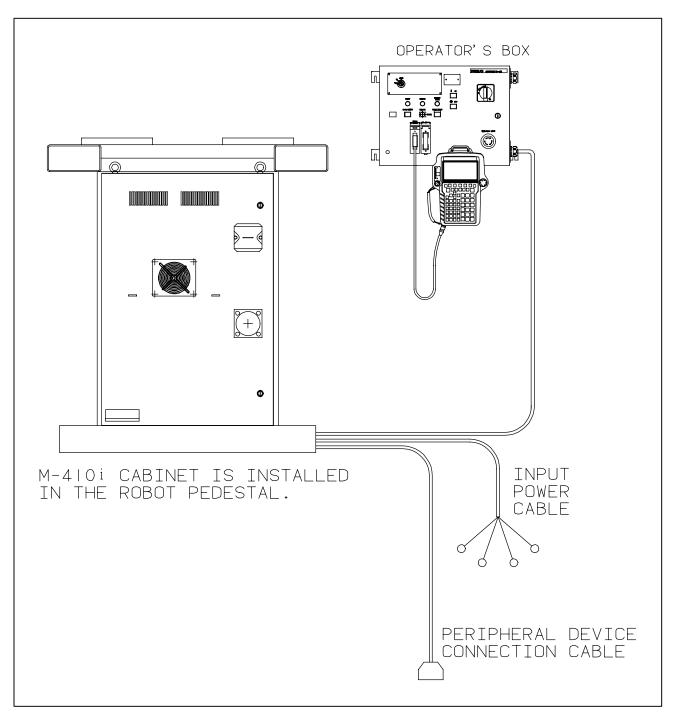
(b) Connecting Cables at Installation (M 410*i* cabinet)
